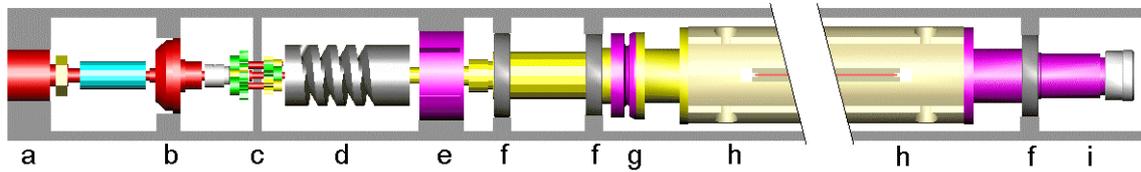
Schematic drawing of main mole components: (a) multiturn potentiometer, (b) piezo-motor, (c) 3:1 reduction, (d) helical coupling, (e) encoder, (f) ceramic ball bearing, (g) Ti coupling, (h) coil, (i) LED and optics.
